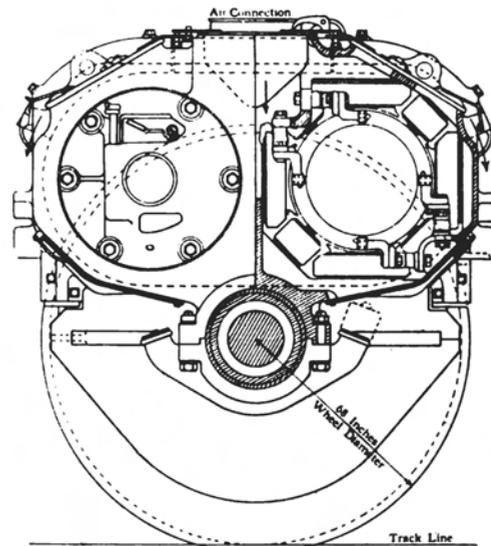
CROSS-SECTION OF A TWIN MOTOR WITH QUILL DRIVE
